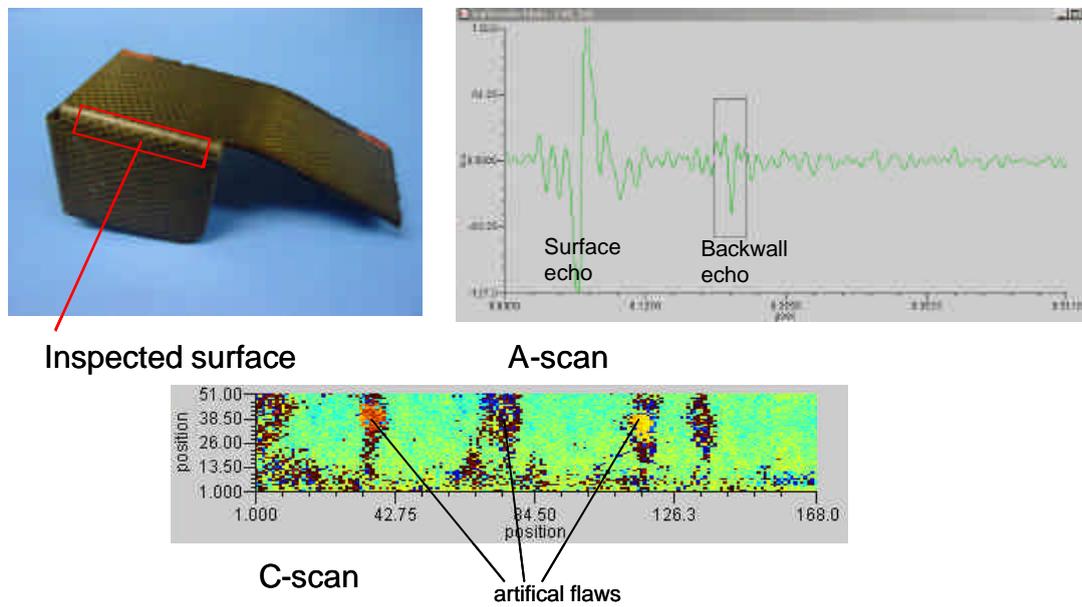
Laser UT Inspection of a Component with Curved Geometry
